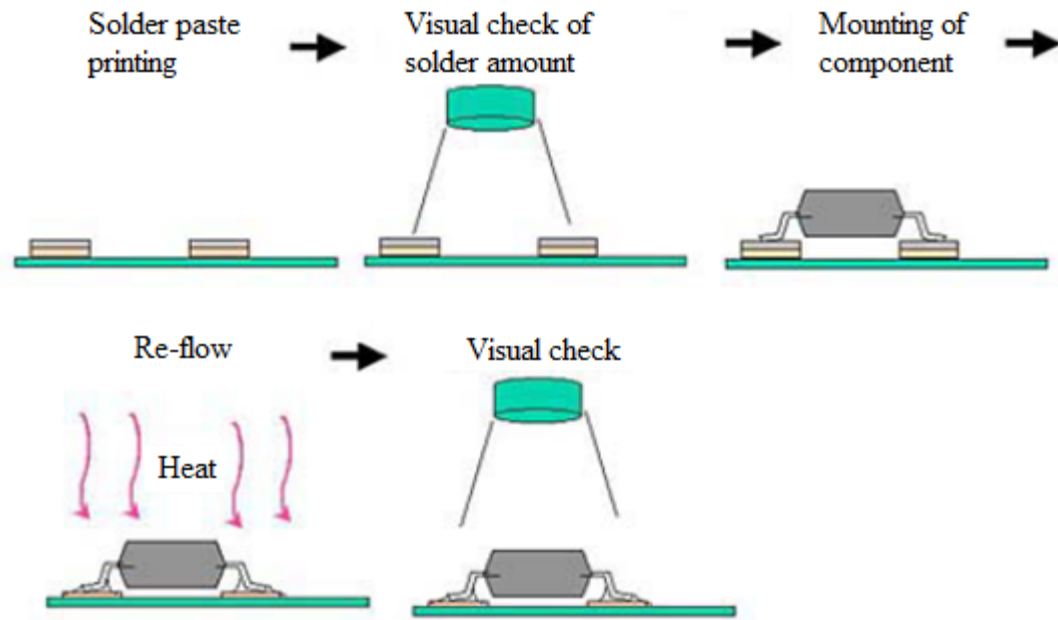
Process description of re-flow soldering with surface-mount components. Solder paste is applied to areas of the board where components are subsequently to be placed. Heat is applied to the board to melt the solder paste and form solder joints (NEC, 2000).
